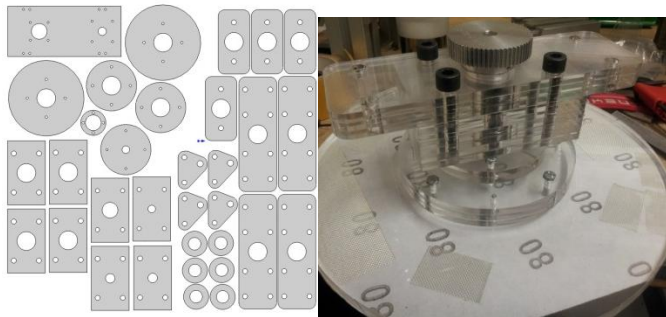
Showcase of laser cut parts of 5mm thickness, the main parts in this assembly are for the top disc, the bigger holes showcase bearing connections, while the smaller holes are generally assembly using bolts.
